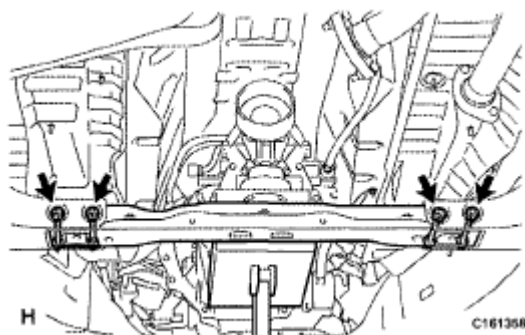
Identifying Nuts, Washers, Bolts And Frame Crossmember
